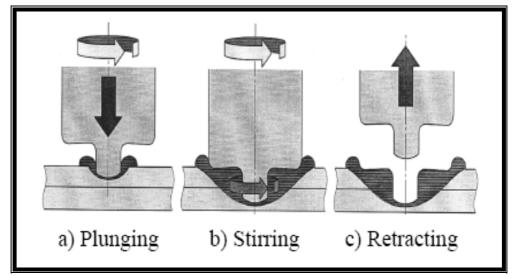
Three stages of friction stir spot welding process [Cemal, 2005].
